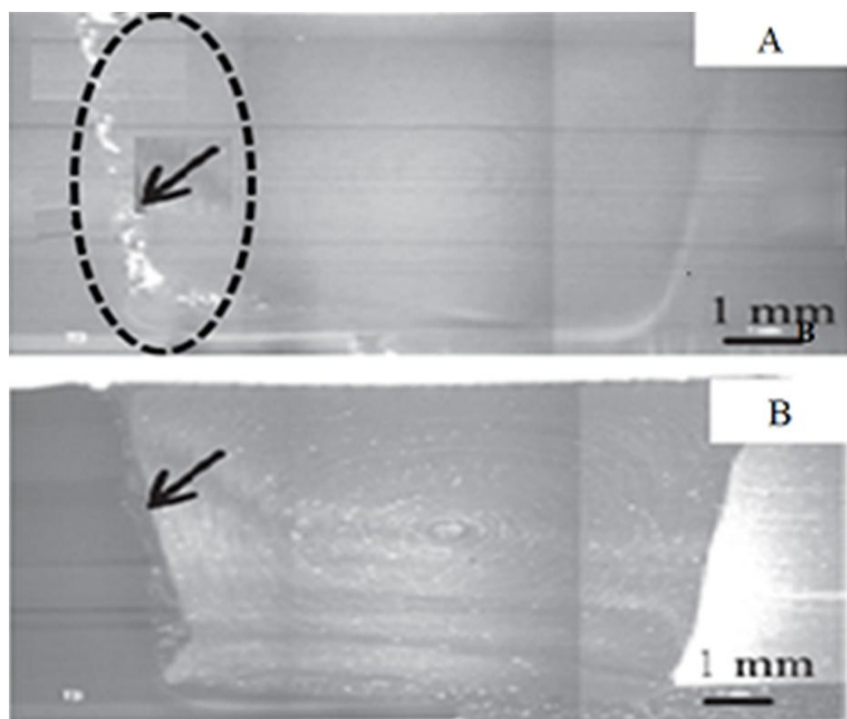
Macro structure of welding cross-section with the rotational speeds of the different tools (A) Test No. 11 (B) Test No. 13
